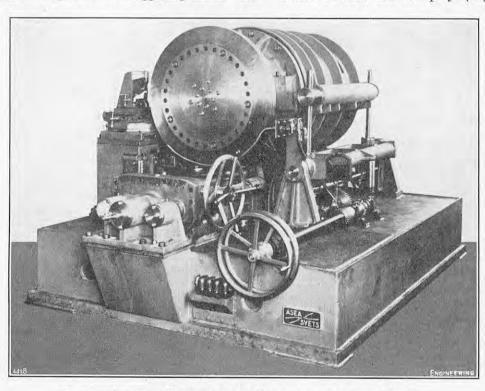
Welding Head for Tube Mill; Asea Electric, Limited.
